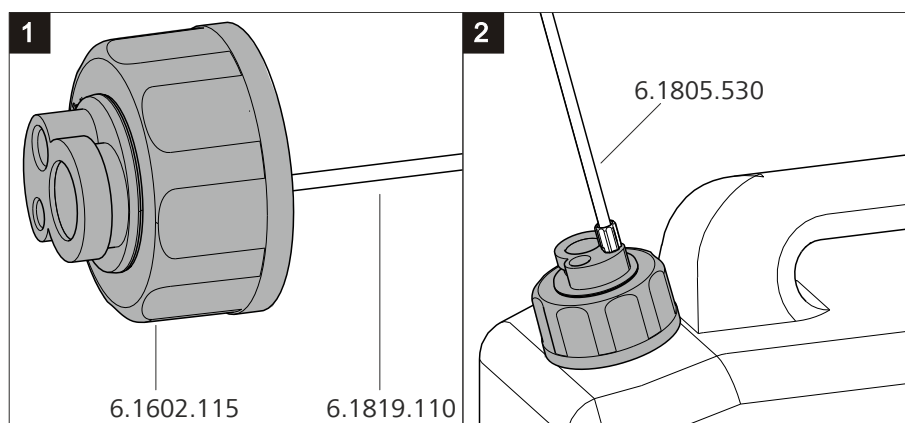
Installing a bottle cap with pieces of tubing on a rinsing canister
